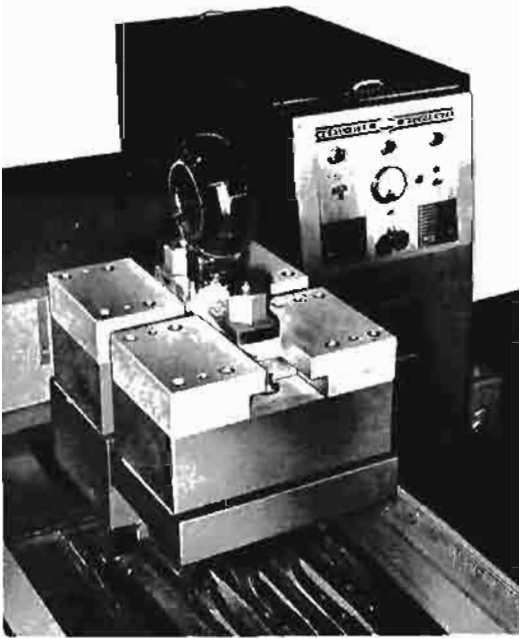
Large cross-section magnet mounted in its magnetizing fixture atop magnetizing transformer. Control cabinet houses rectifier and switching equipment. Capacitor bank is a separate structure (not shown).
